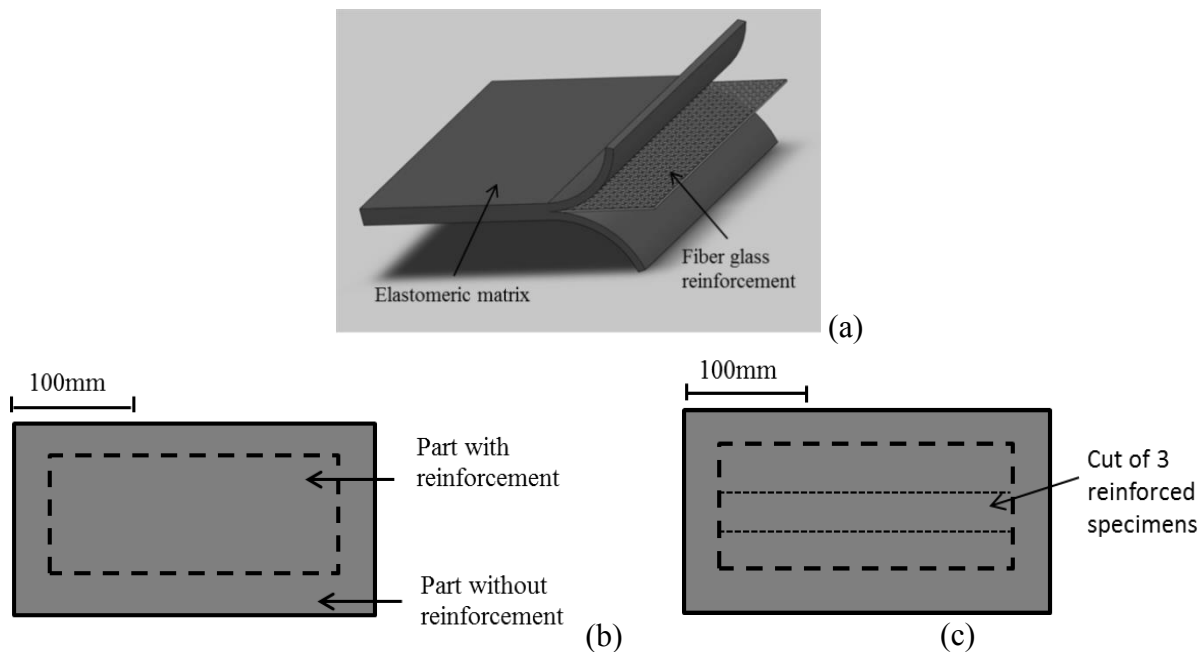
Design of sample panels. (a) 3D drawing of rubber composites. (b) Schematic view of composite plate for aging test with isolated edges. (c) Illustration of the 3 reinforced specimens obtained after the cut.
